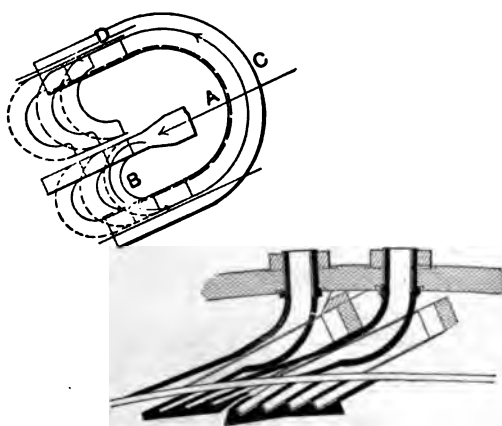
Buckets and Guides of Compound Riedler-Stumpf Turbine.
